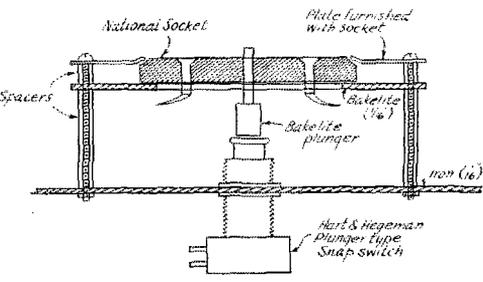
Rotatable Kinescope socket with high-voltage disconnect. A plunger-type switch is kept closed so long as the tube is in the socket, but opens the primary circuit of the high-voltage transformer when the tube is removed.
